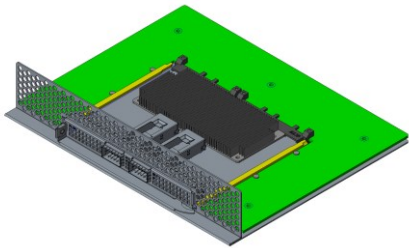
Large Form Factor NIC Chassis Mounted 3D Views
